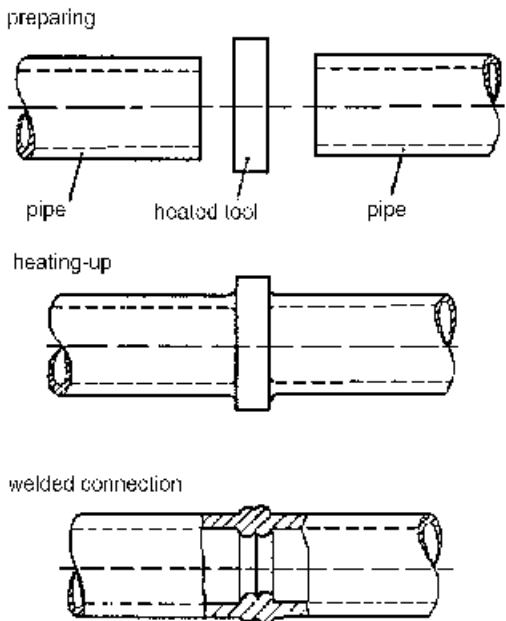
Principle of the heated tool butt welding with example pipe.
